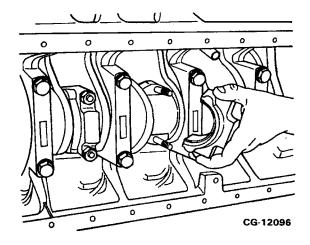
Remove the Connecting Rod Cap and Bearing Insert
